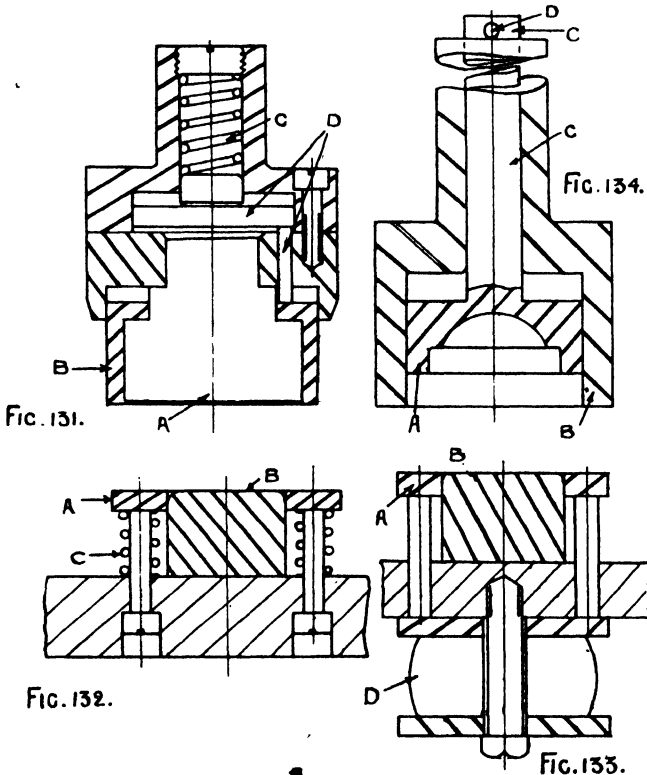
PUNCH AND STRIPPER COMBINED.
